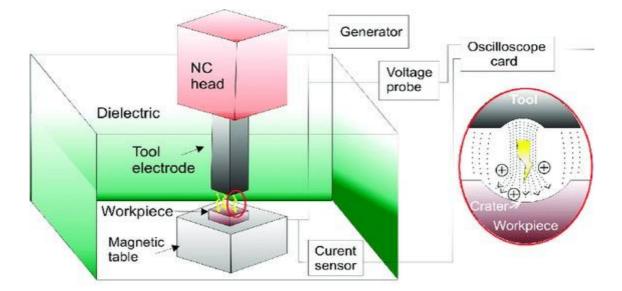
D Die-Sinking Electrical Discharge Machining
